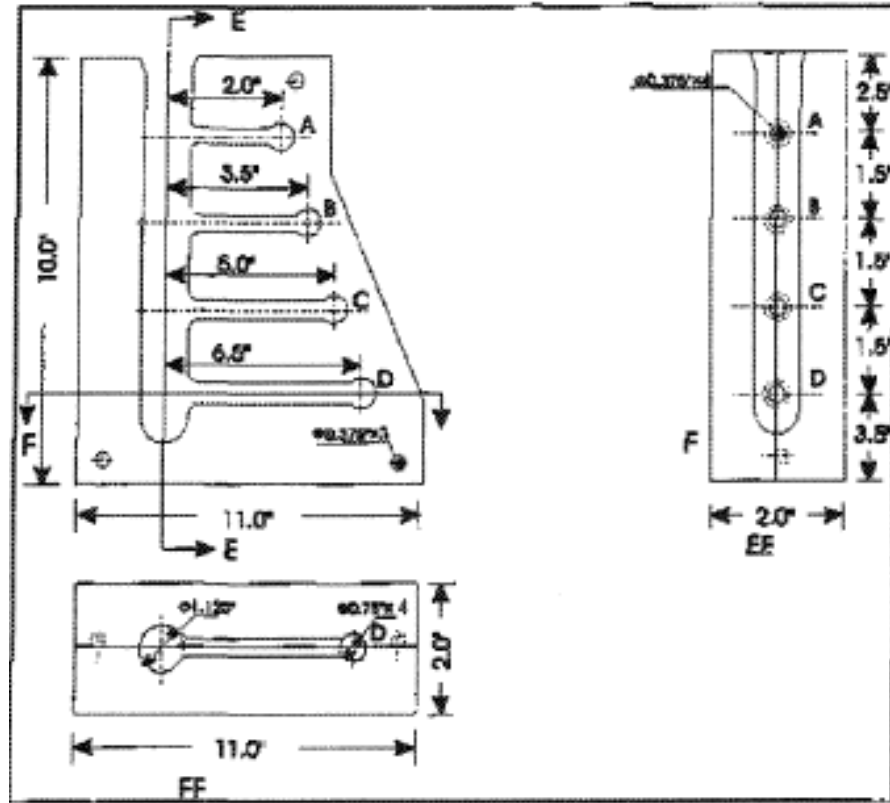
The dimensions of the hot-tearing test mold (CRC).
